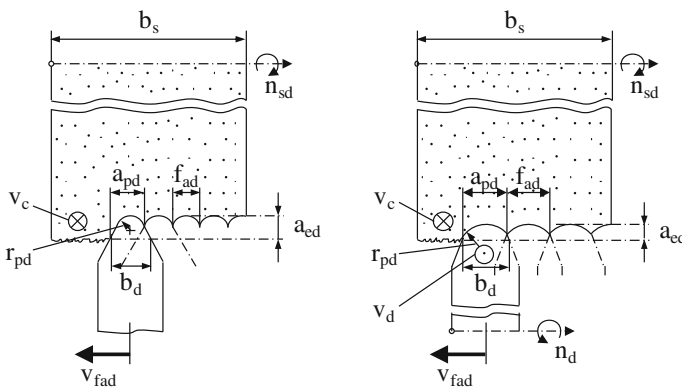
Geometric and kinematic relationships in conditioning processes. a Fixed dressing tool. b Rotating dressing tool
